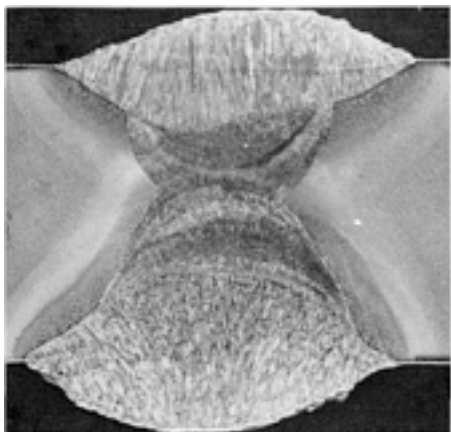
Cross-sectional view of a butt welded joint between two 13-mm ($\frac{1}{2}$ -in.) thick plates of ASTM A517, Grade J, steel. Arc welding and a joint of double-V-groove design were used. Note the columnar structure of the weld metal in the outer portion of the weld. The heat-affected zone is also apparent. 2% nital. 4×
